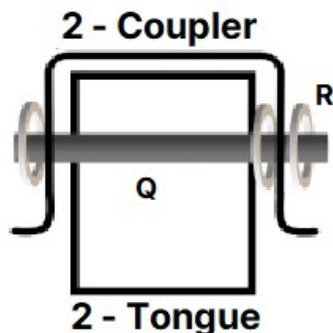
To prevent pinching the coupler while tightening, use an extra 19mm flat-washer (R) threaded onto the 3" bolt (Q), between the tongue (2) and the coupler (2).
